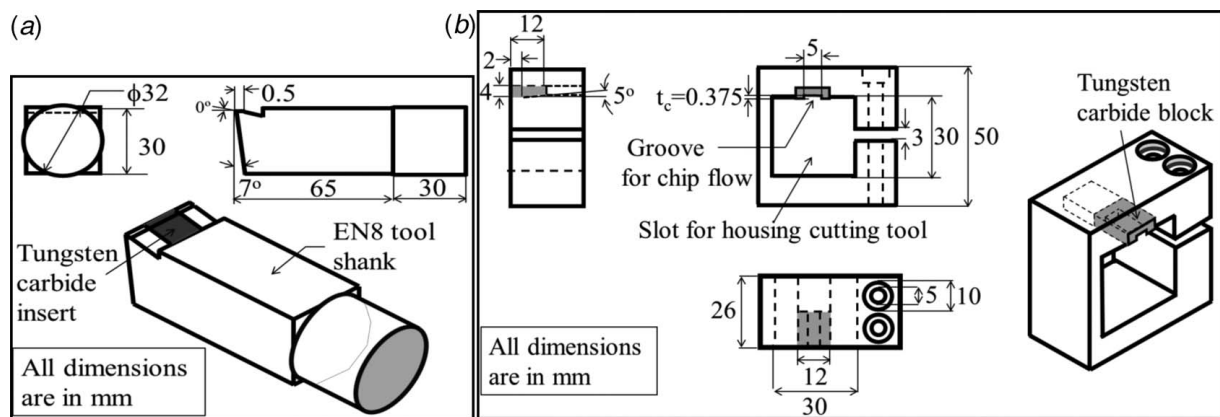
Schematic of the cutting tool and fixture for implementing LSEM [26]: (a) restricted-contact single-edge cutting tool and (b) LSEM fixture
